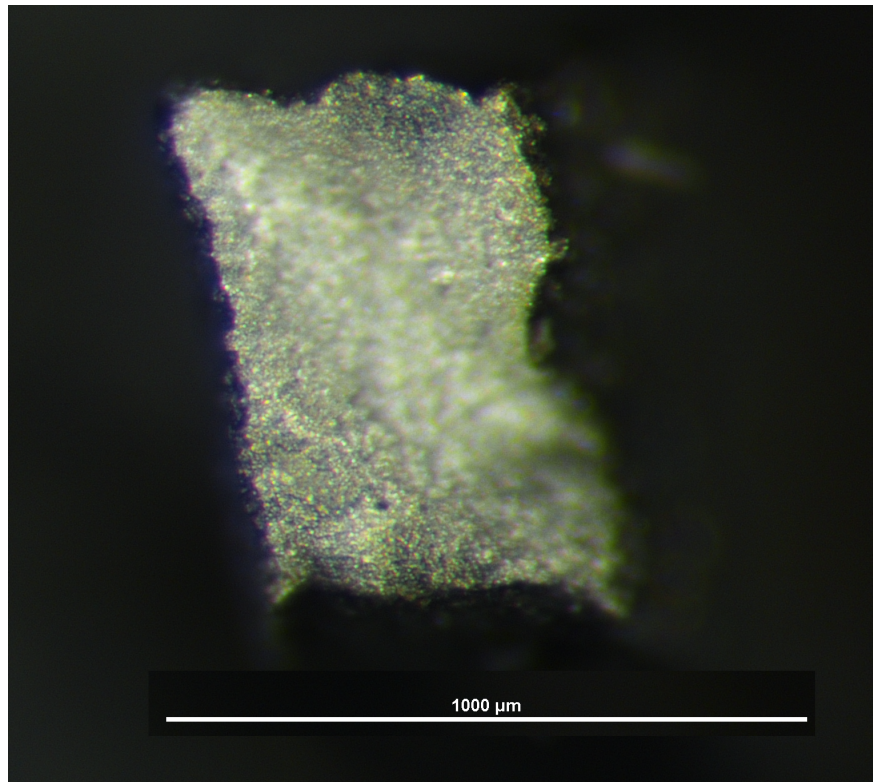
Optical microscope image of a fracture surface of specimen V3-4
